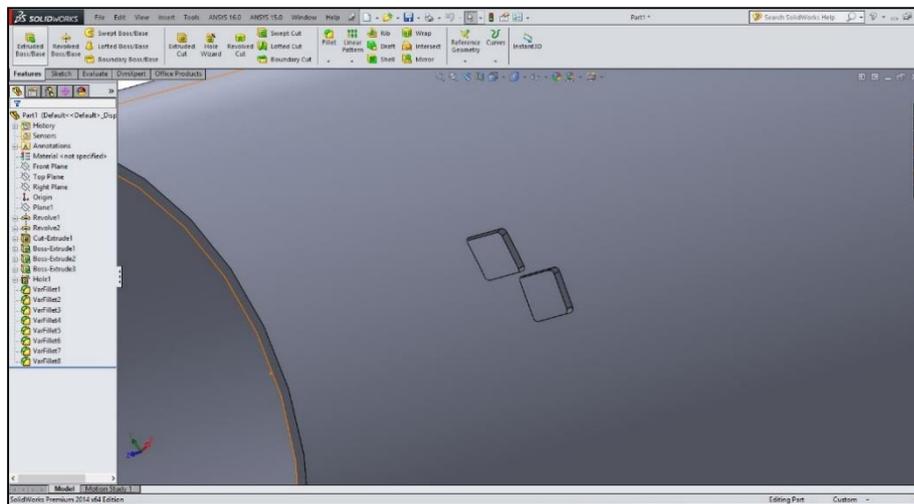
Pipeline Corrosion Defects Model Using Solidworks
